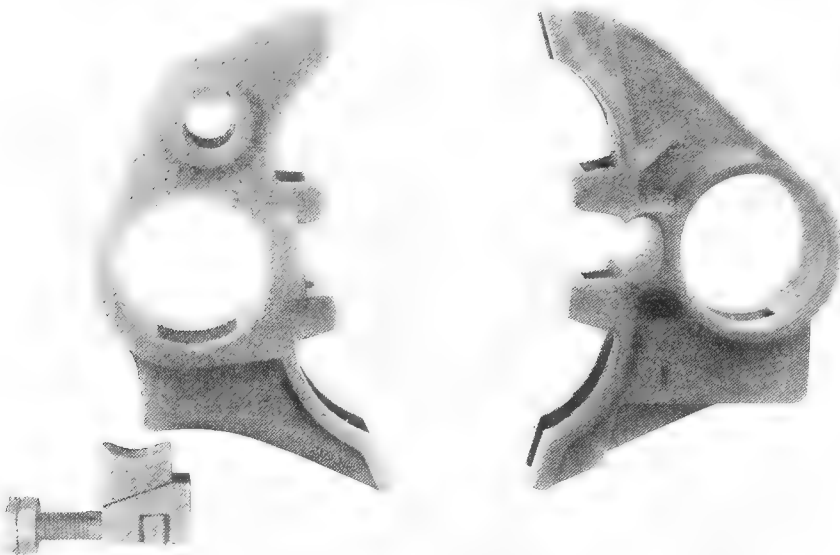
Adjustable Brake Heads for Vulcan, Hercules and Ajax Passenger Brake Beams
